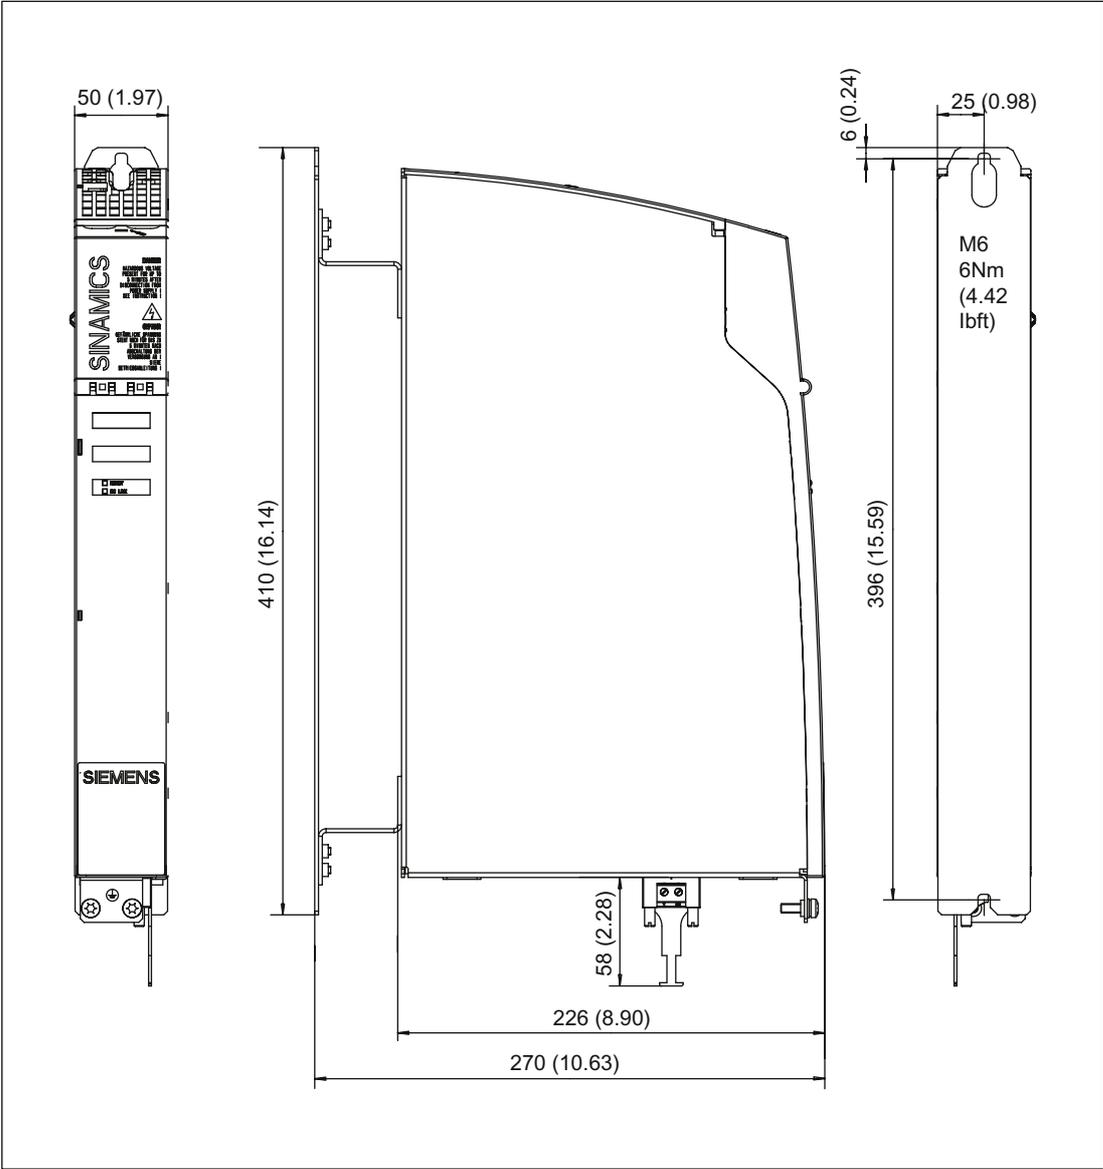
Dimension drawing of Braking Module, all dimensions in mm and (inches)
